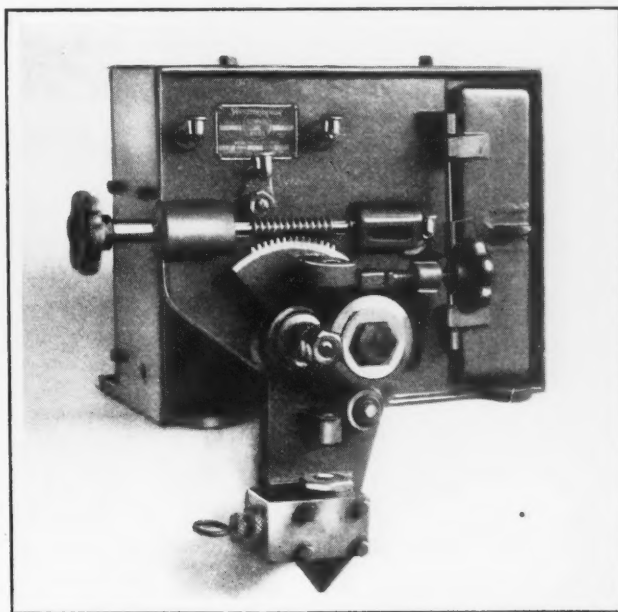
Westinghouse Automatic Arc Welder
